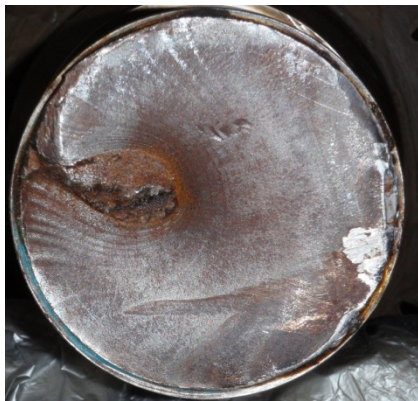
Typical shaft failure due to misalignment, shaft service was 6 months.
